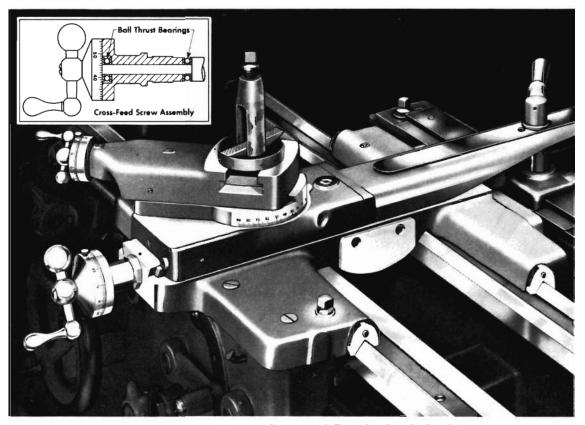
Improved Saddle and Compound Rest for South Bend Lathes
